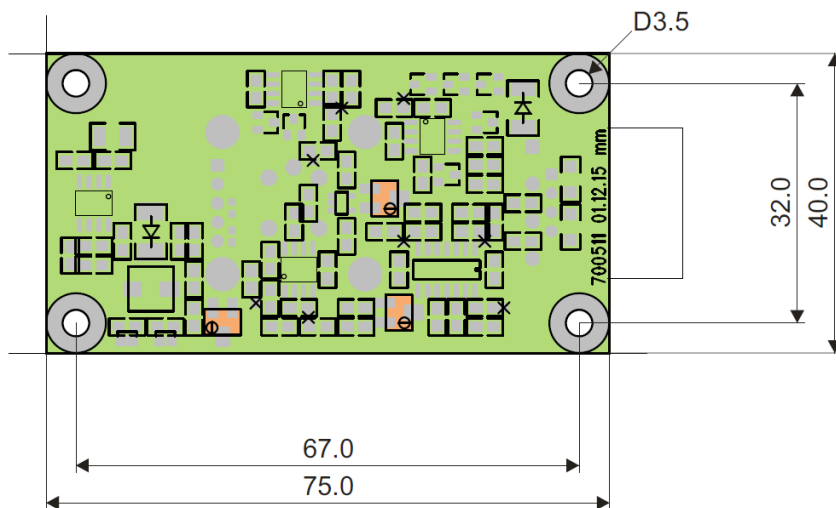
PCB electronic layout for FCX-MP1000-Extern-CH (back side of the board)
